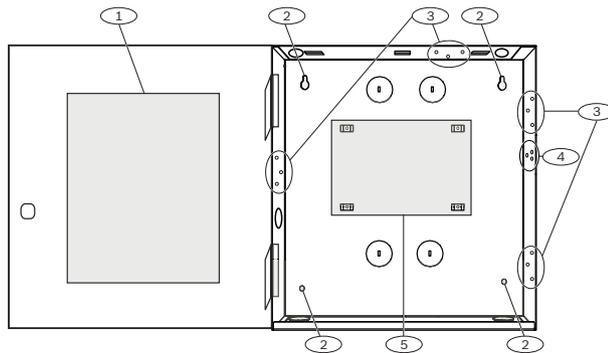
Enclosure and control panel mounting (B10 shown)
